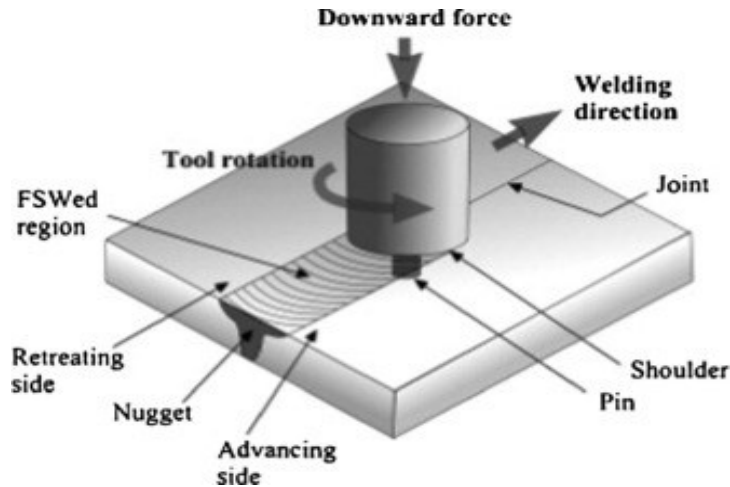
Friction stir welding process (He, Gu, and Ball 2014)
